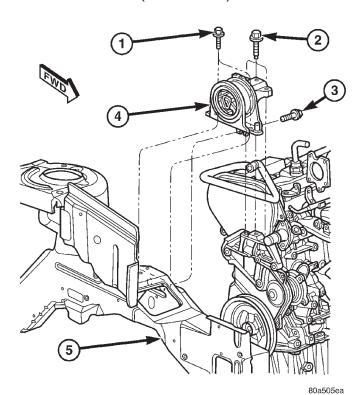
RIGHT MOUNT TO RAIL AND ENGINE
